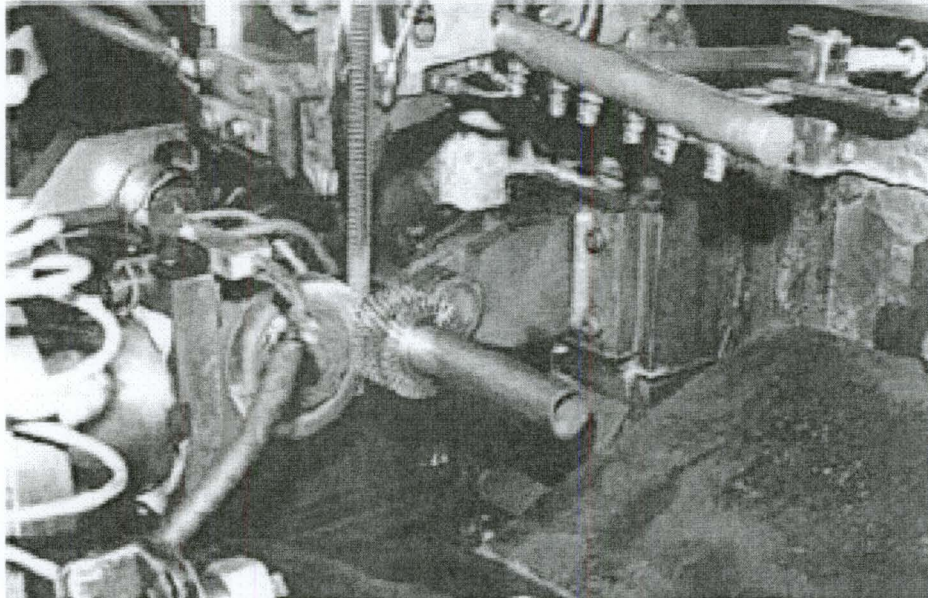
High Frequency Resistance Welding of a Serrated, Helically Wound Finned Tube
